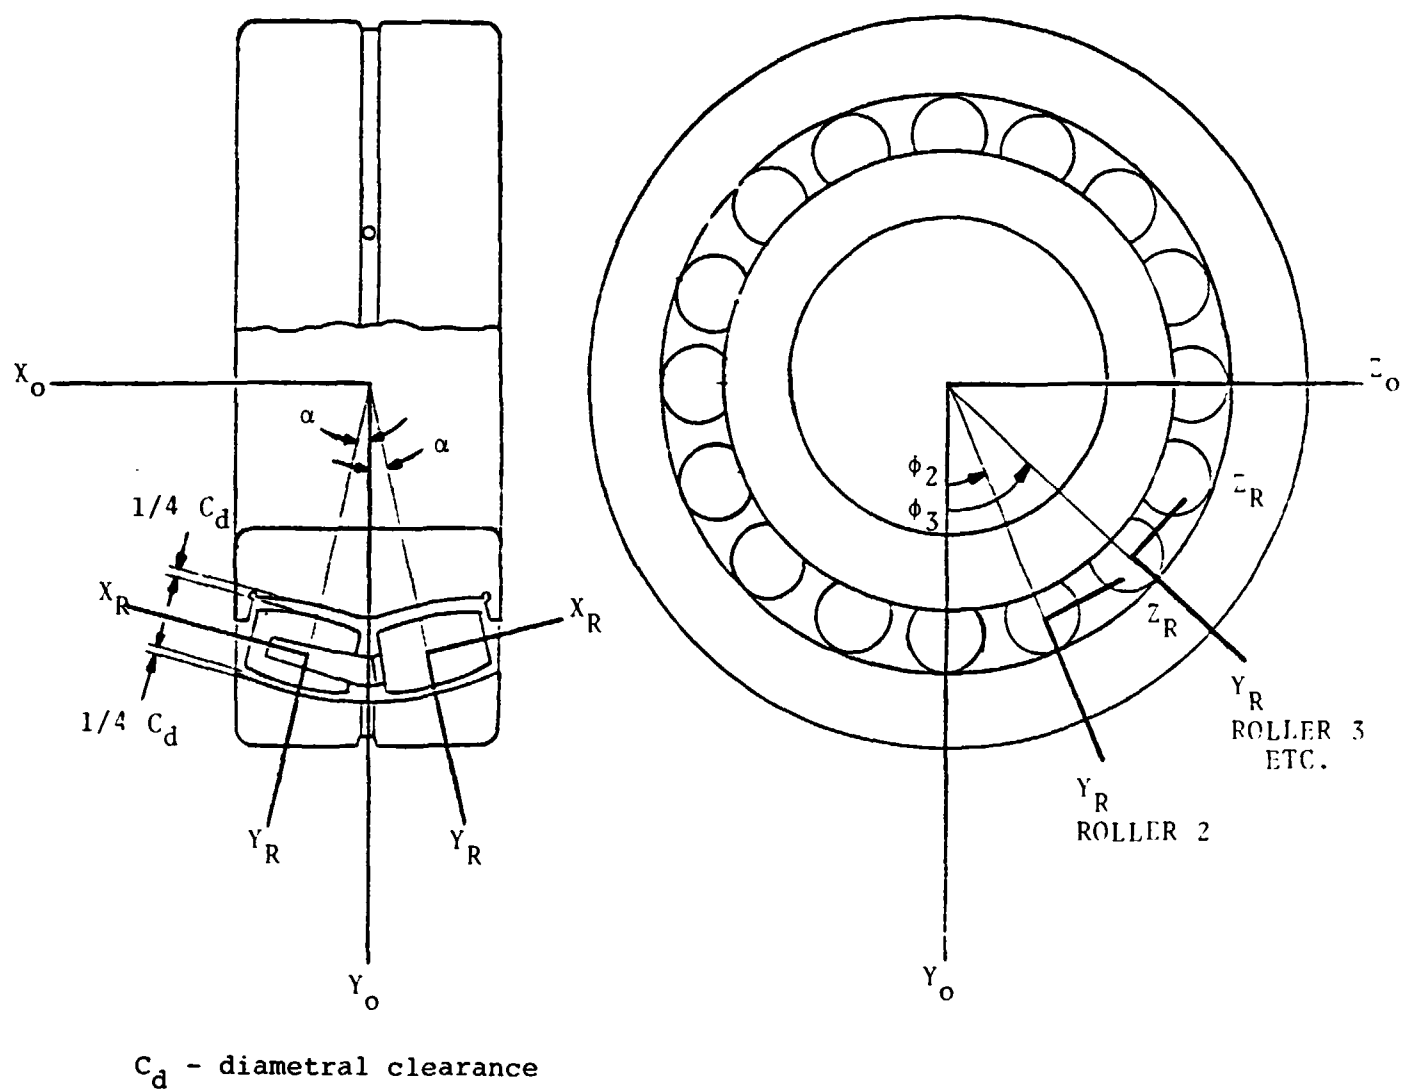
SPHERICAL ROLLER BEARING GEOMETRY
